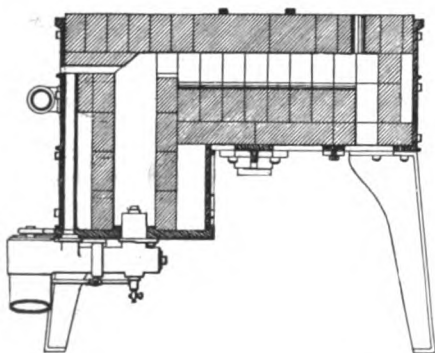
General Construction of Ferguson Flue Welding Furnace.
